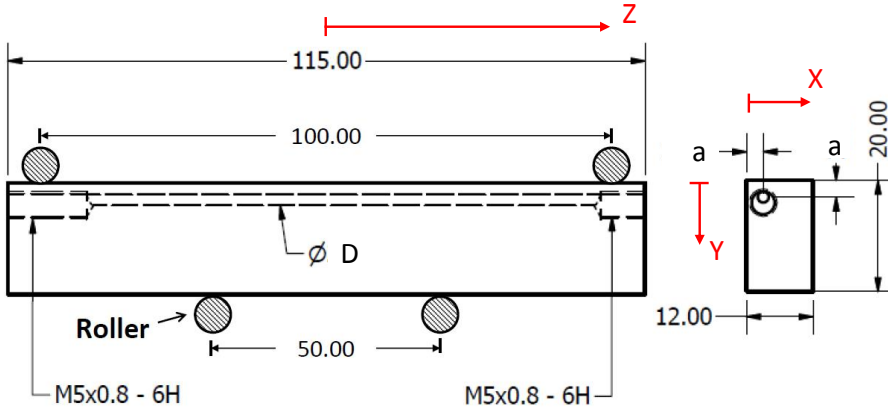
Four point bending fatigue test setup and specimen with straight capillary. Dimensions in millimetre.
